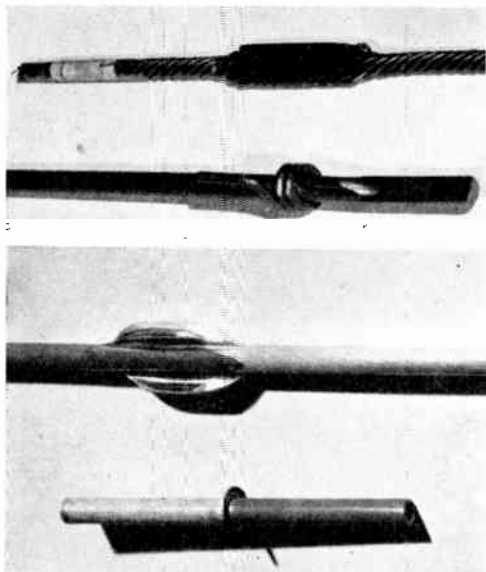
Wire joints made by Cold Pressure Welding.
